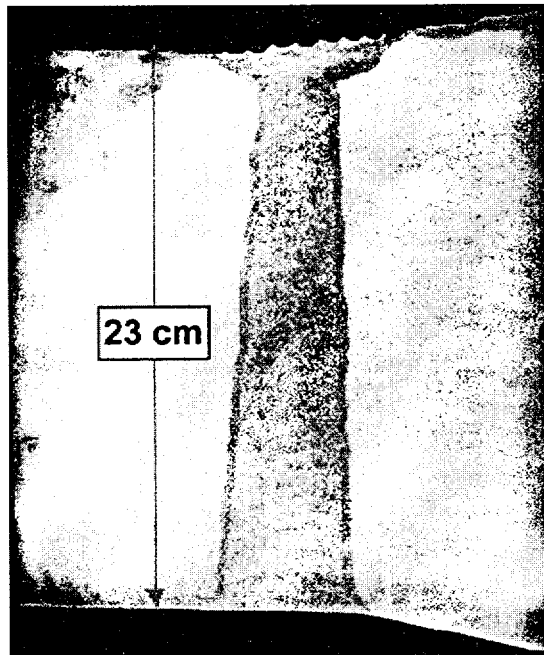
Weld Cross Section for Intermediate-to-Upper Shell Girth Weld
